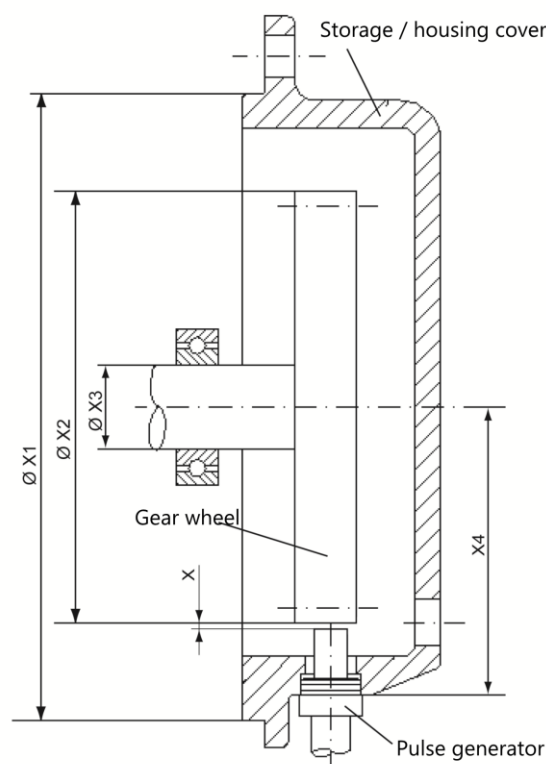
/3: Example presentation of a pulse generator installed in a bearing cap piece
